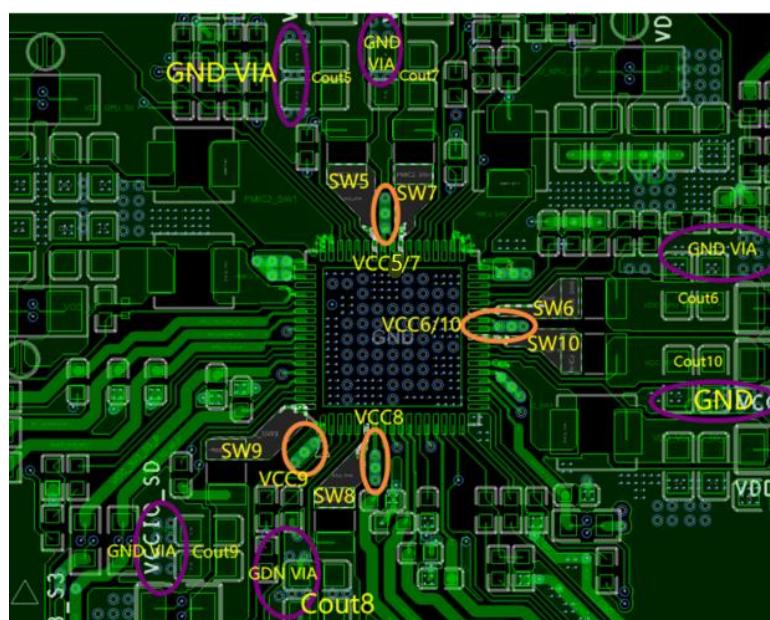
RK806 2.5A BUCK Layout and Routing
